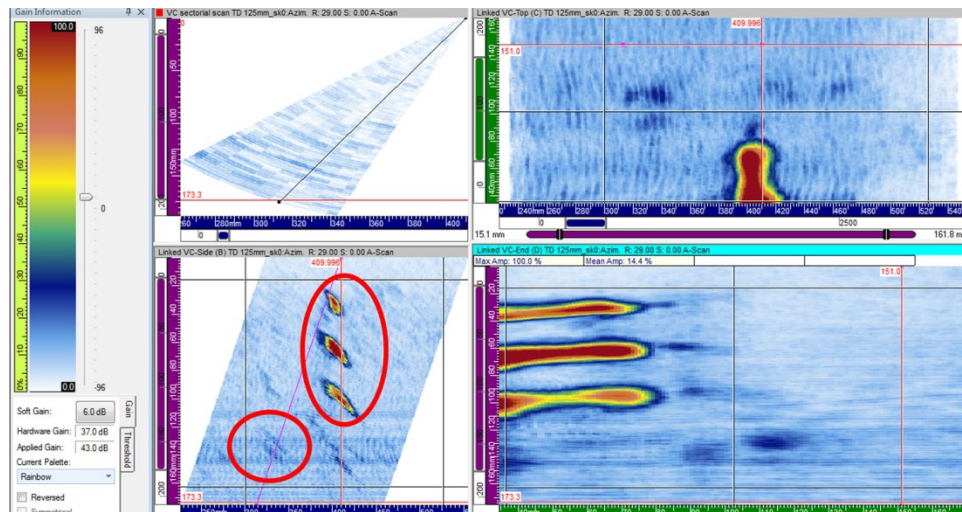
CW, Skew 0 (reduced gain). Axial flaw 1 (left) and three side-drilled holes (right) are visible and circled in red.
